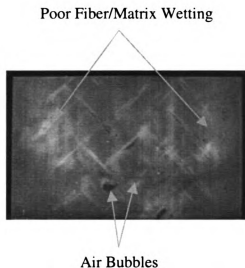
Product Defects of Reaction-Injection-Molded Composites.
